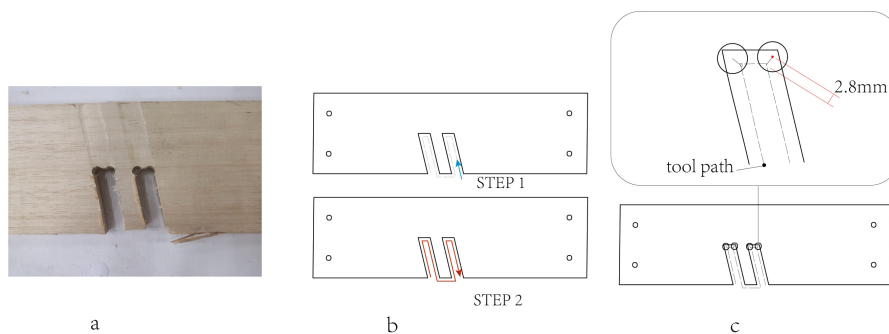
Adjustment of the tool path: (a) peels at finishing cuts, (b) tool path of the pre-cut, (c) solutions to resolve R angle issues.
